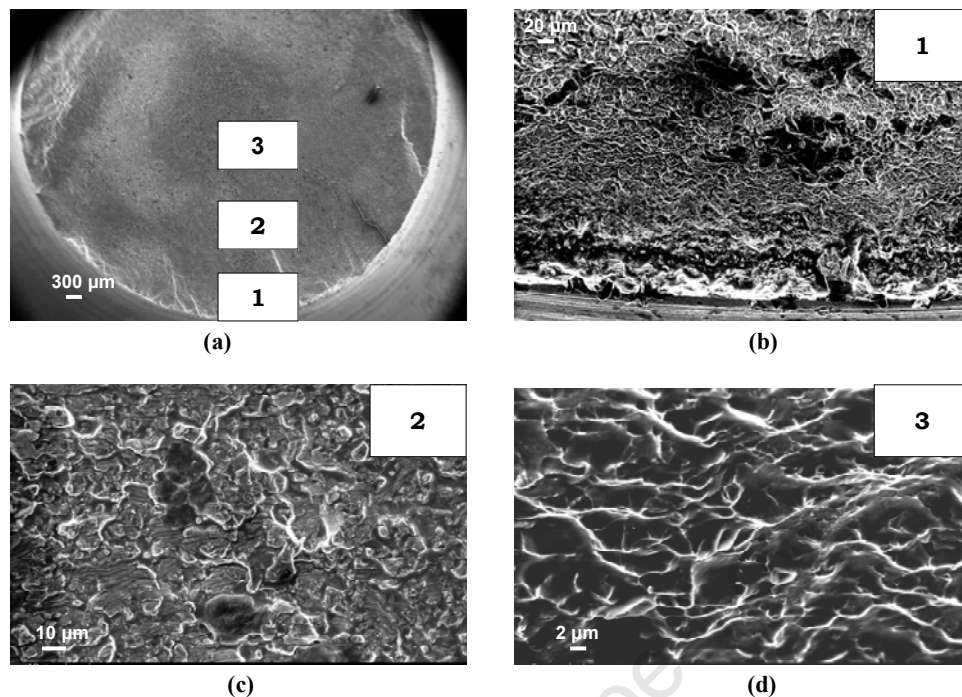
Fatigue fracture morphology of Ti-6Al-4V in the as received condition. (a) overall fracture surface; (b) crack initiation zone; (c) crack propagation zone and (d) fast fracture zone
